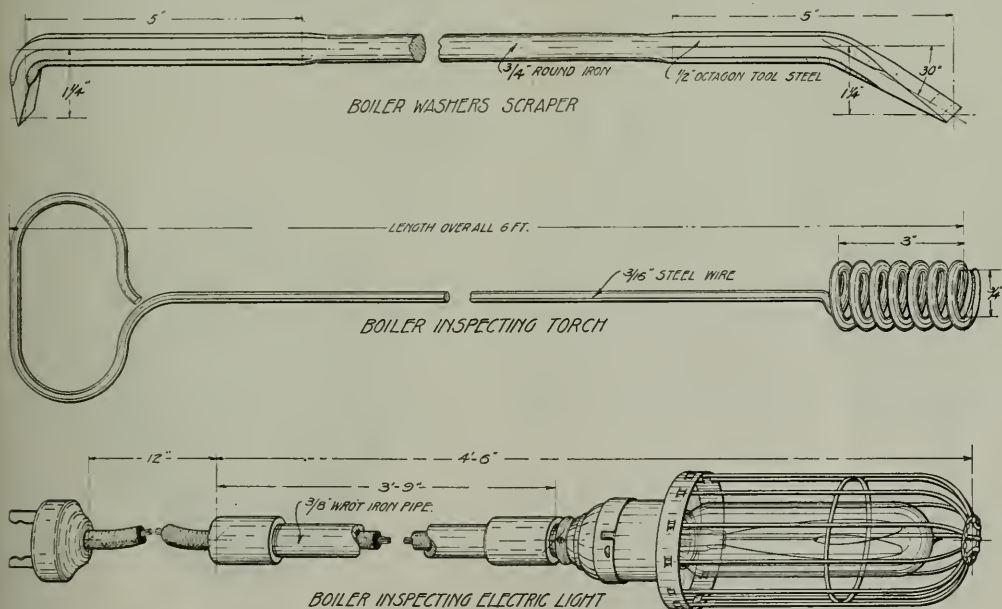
Scraper and Inspection Torches for Washing Boilers
